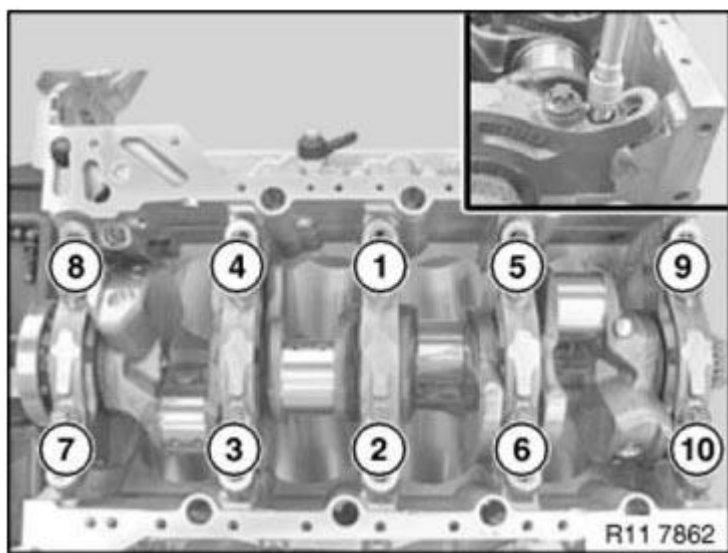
Identifying Collar Bolts (M8) Releasing Sequence
